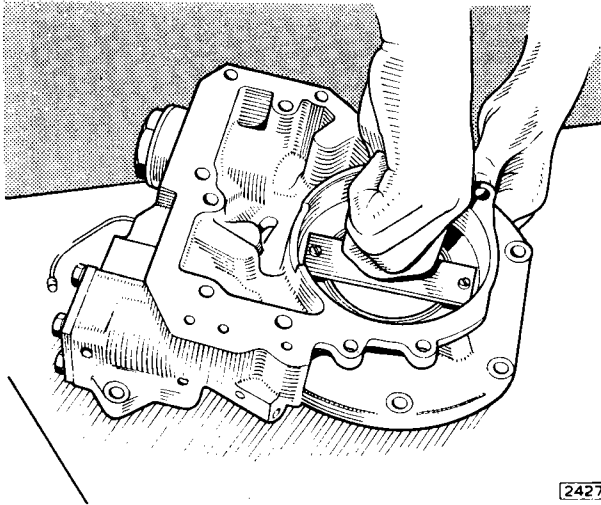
Extracting the hydraulic piston with Special Tool No. L.300
